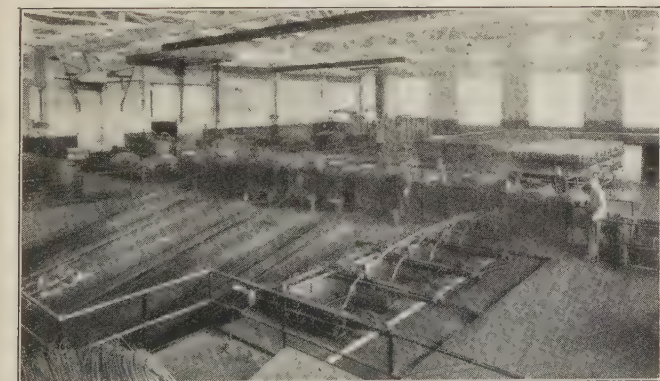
VIEW OF INTERMEDIATE AND FINISHING MILLS AND COILERS
